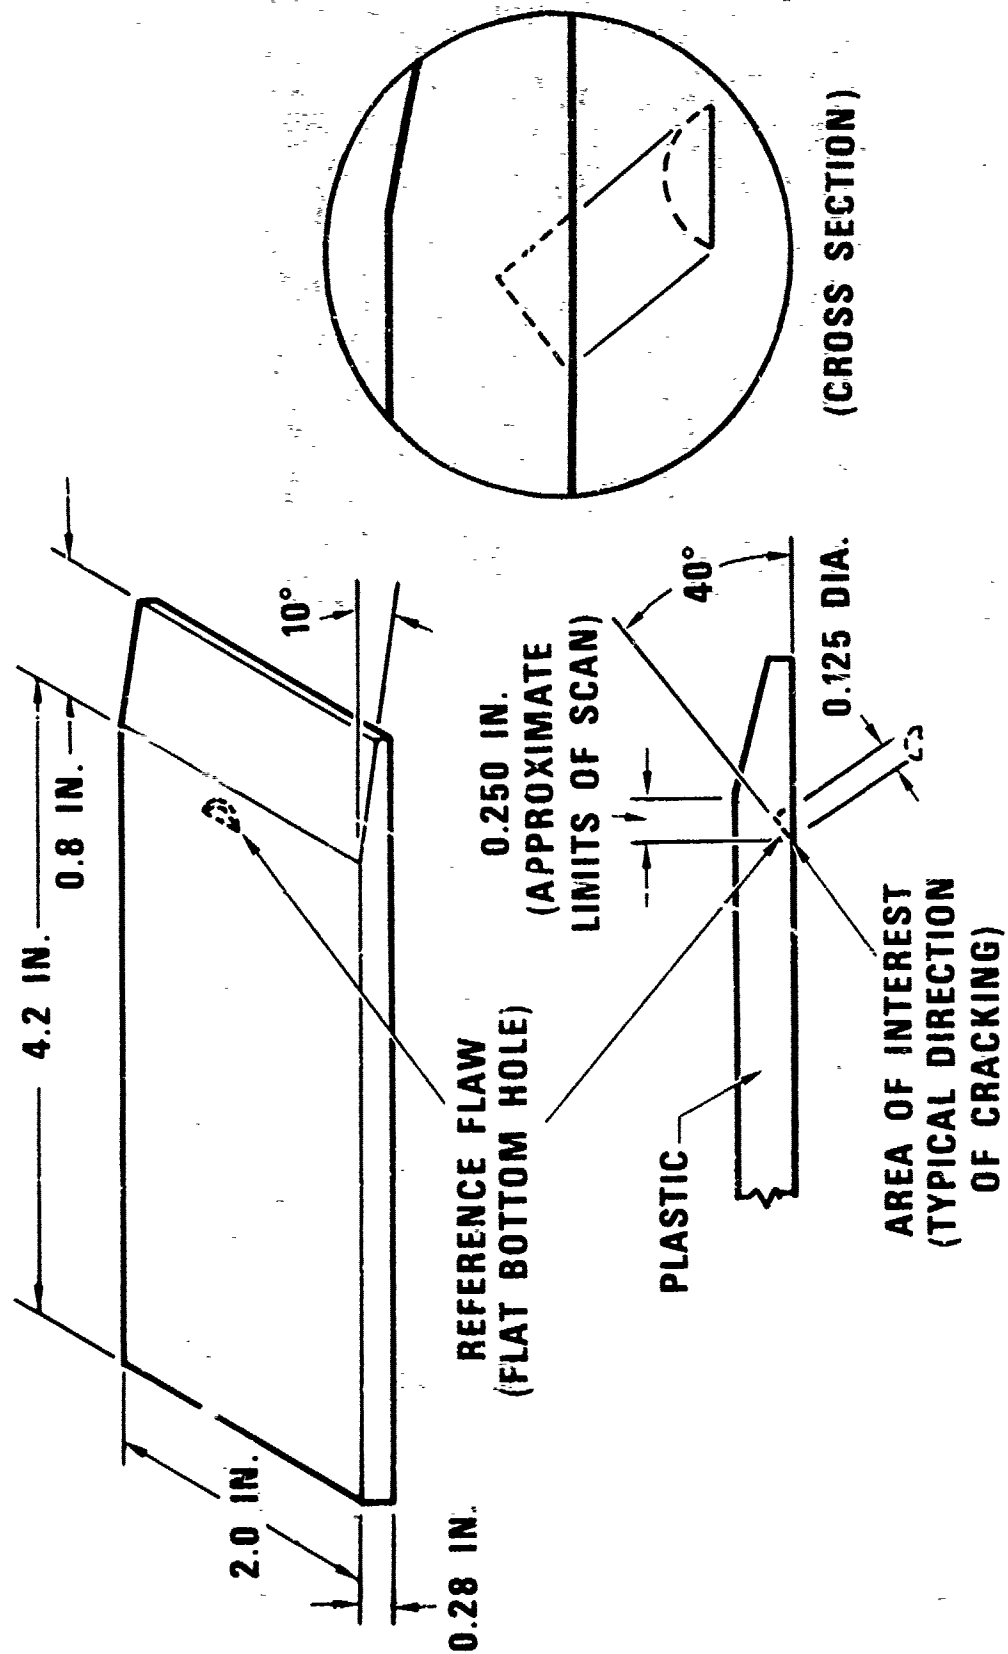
REFERENCE STANDARD - DELTA TECHNIQUE
